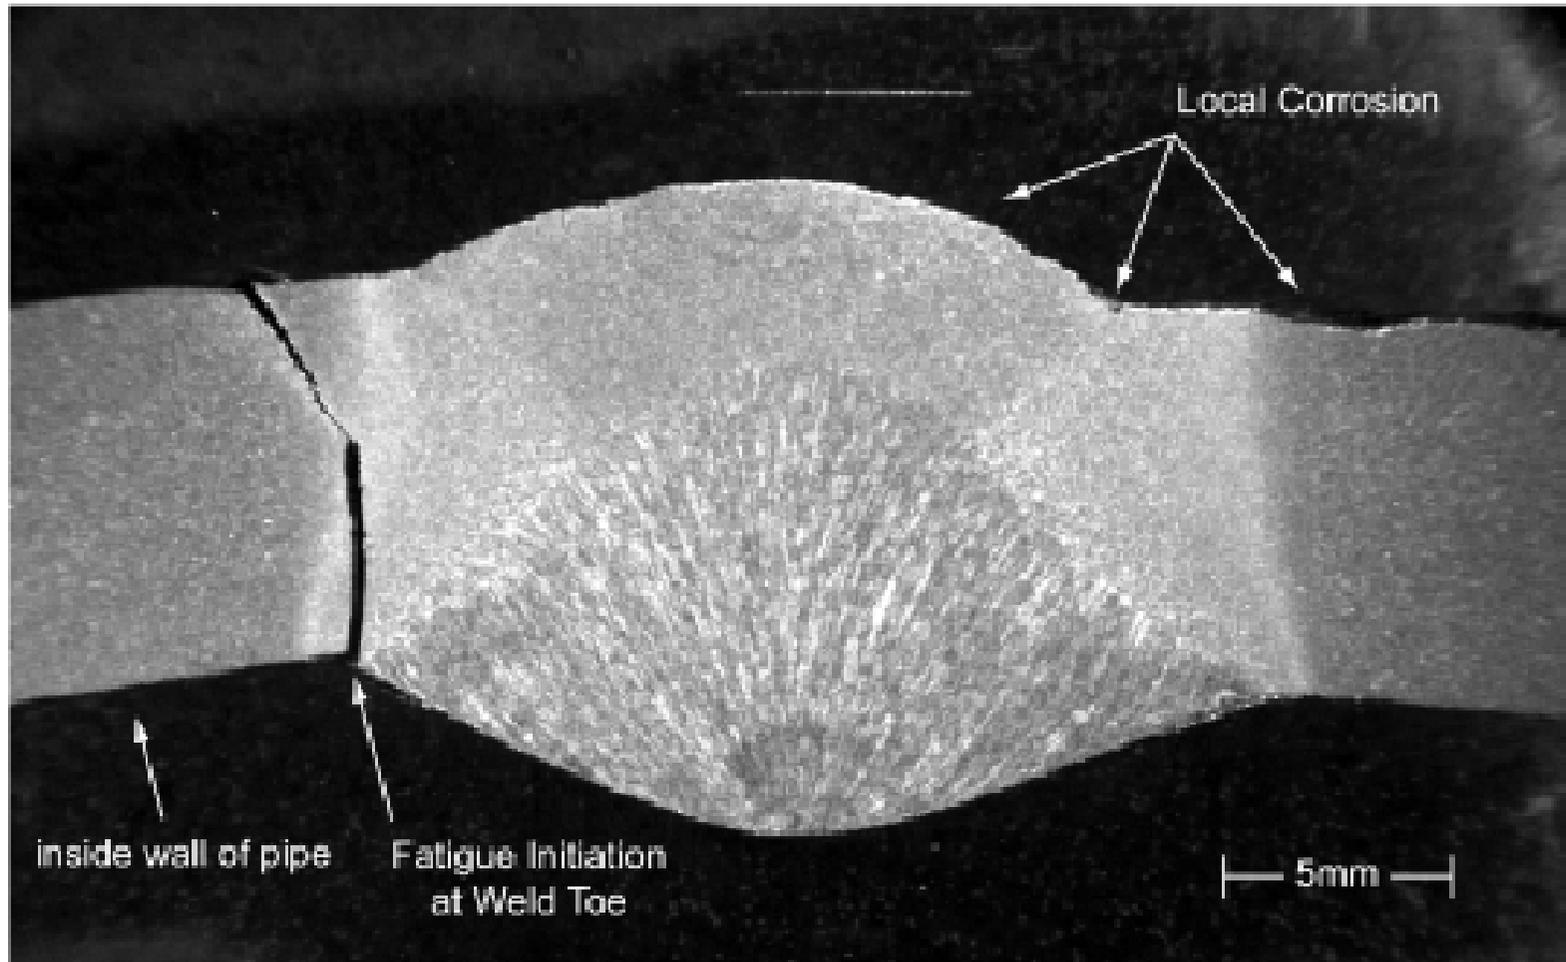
Fatigue initiating at toe of weld on interior surface of pipe.
